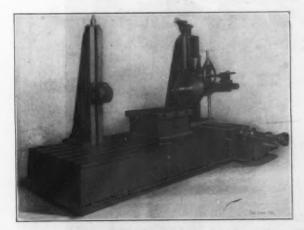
The Machine with Removable Table and Tail Support in Place.
